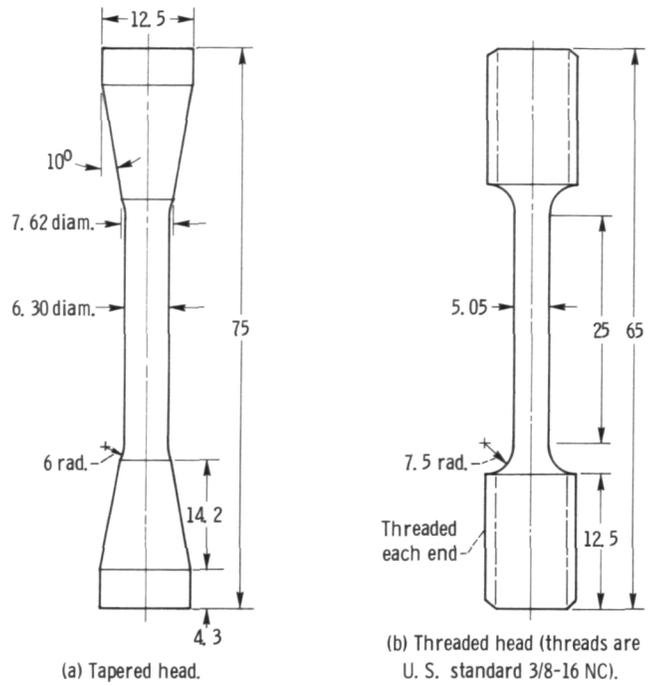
Specimens used for tensile and stress rupture tests (all dimension are in mm).
